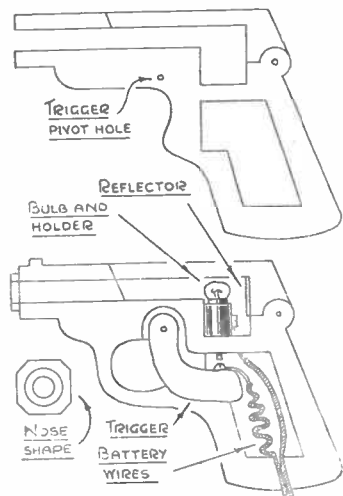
Centre cover parts and (below) detail of interior mechanism
